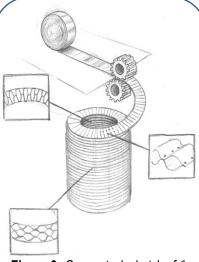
Conceptual sketch of the new cylindrical honeycomb manufacturing method.
